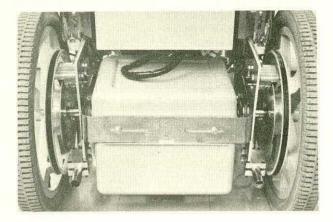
Rear view of powered wheelchair equipped with hydraulic brakes showing method of mounting.
